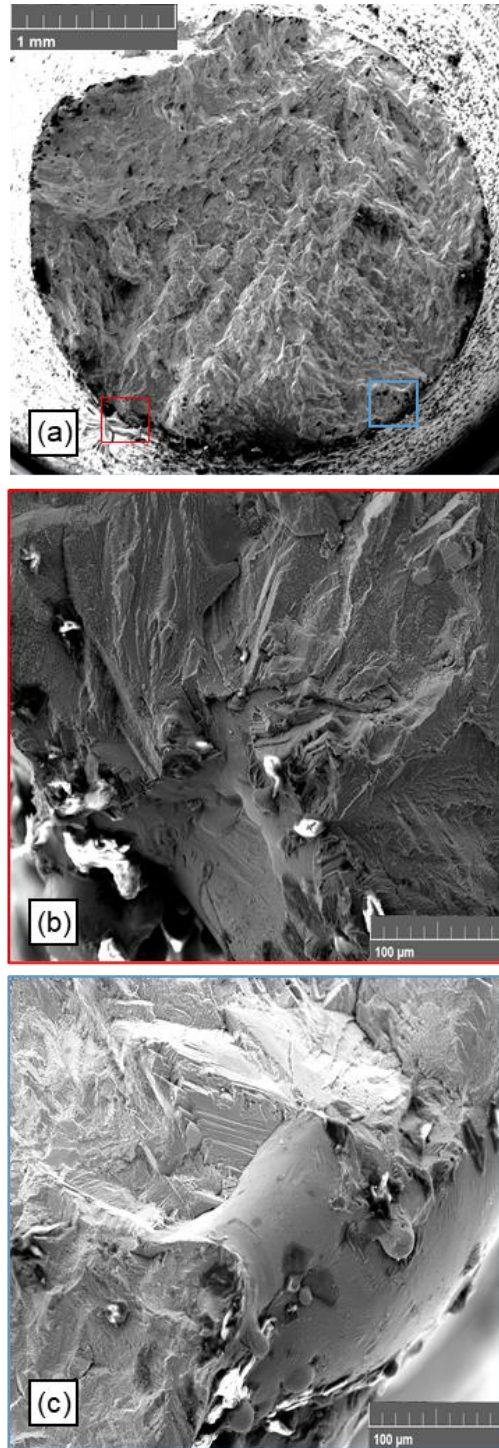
SE fracture surface of an as-built D LB-PBF Inconel 718 specimen tested at $\sigma_a = 500$ MPa with a corresponding fatigue life of $2N_f = 2.58 \times 10^5$ reversals. The overall fracture surface in (a) shows a tortuous crack path, which is characteristic of fatigue fractures resulting from multiple cracks. Crack initiation sites in this type of specimen (b)-(c) can be in the form of sharp notches or down-skin surface defects.
